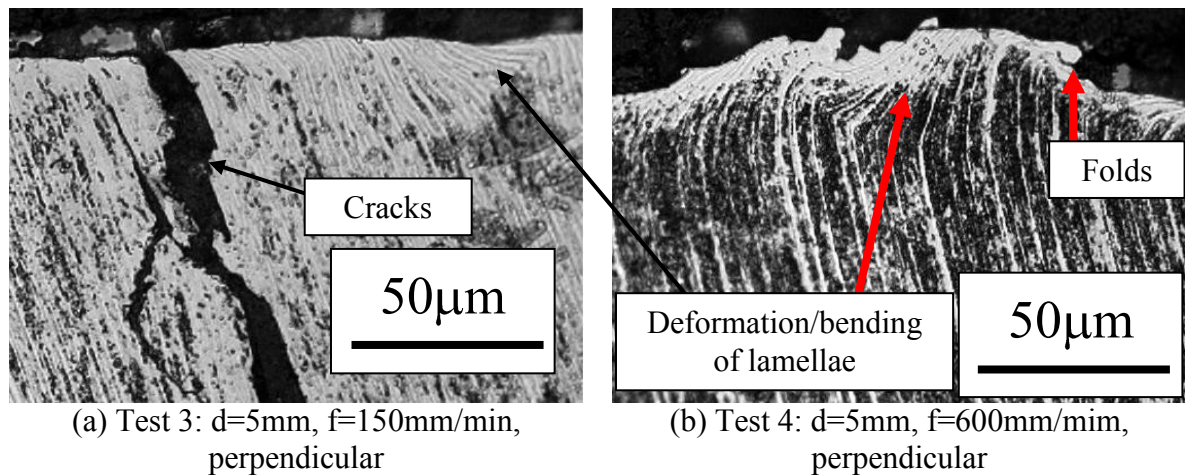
Workpiece surface/subsurface cross-sectional images (Phase 2Aii)
